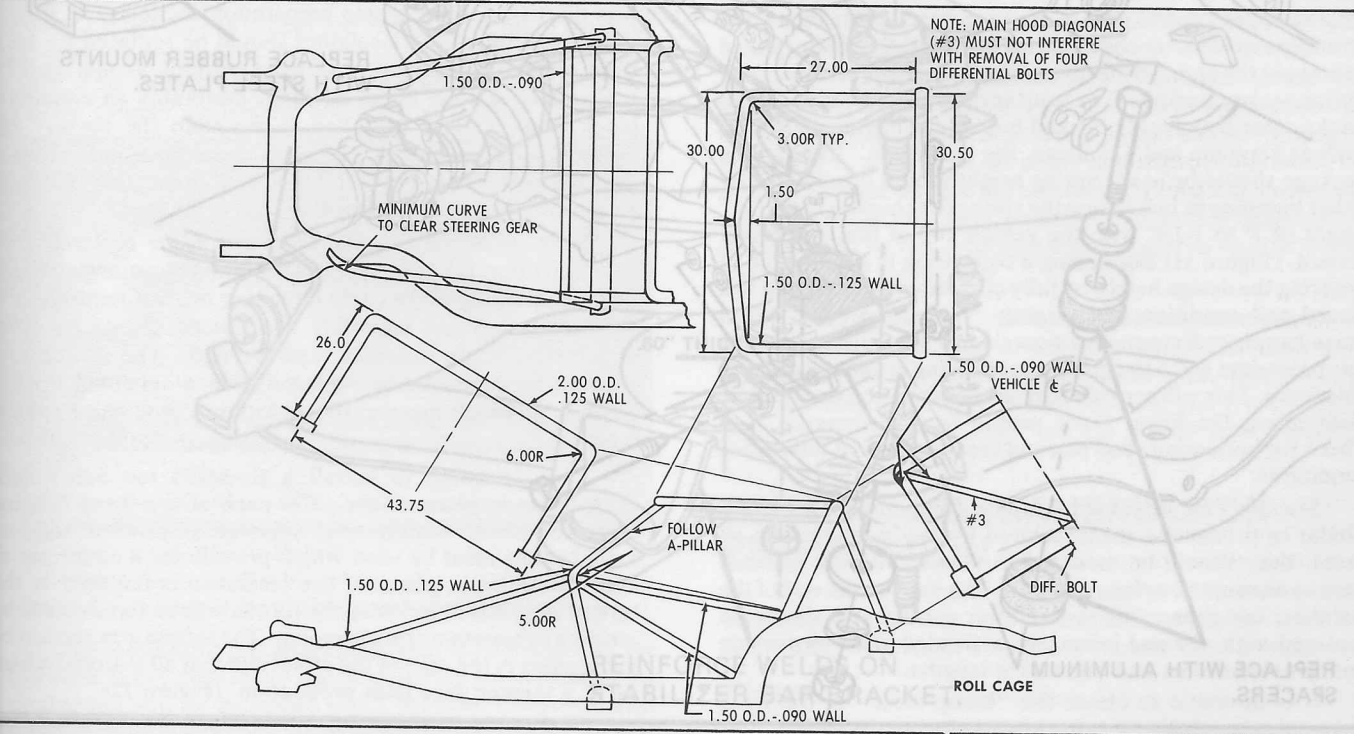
Typical roll cage welded to the frame assembly.
